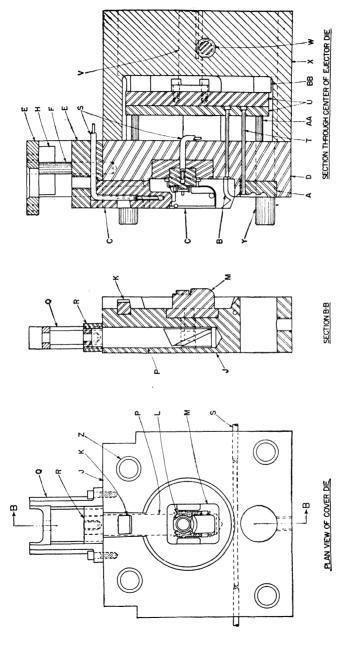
Plan view of ejector die and section views of cover and ejector die in which a ring lock I is used to hold side slides in position during the casting operation. For part legend, see Fig. 2.24b.
